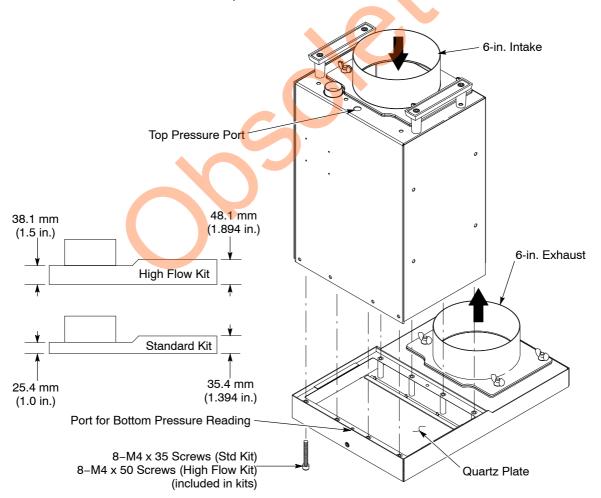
AirShield Kit Installation (External Blower Lamphead Shown)
